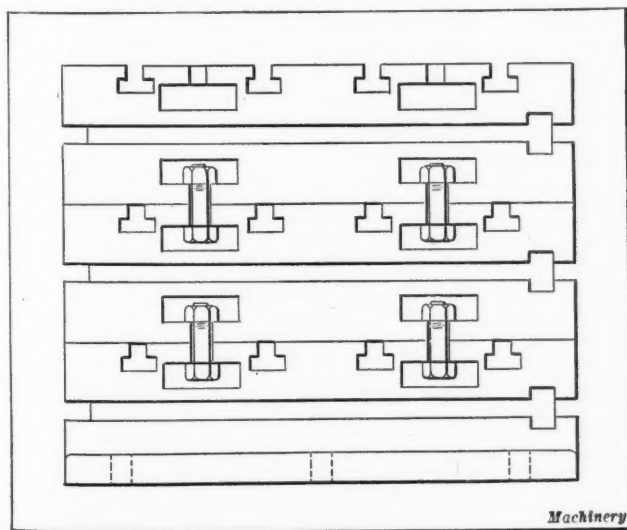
Built-up Box Table of the Type furnished on Cold-saw Cutting-off Machines for raising the Work to suit the Height of the Saw
